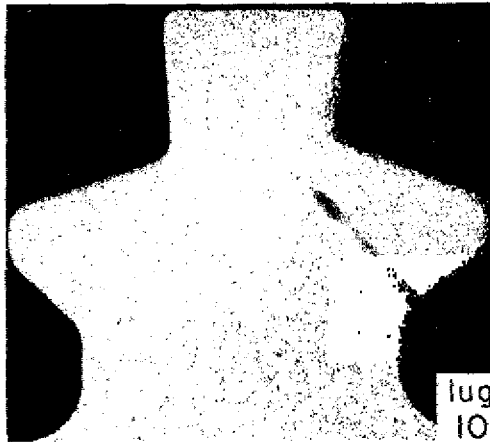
Typical fatigue crack in a disk removed from service
